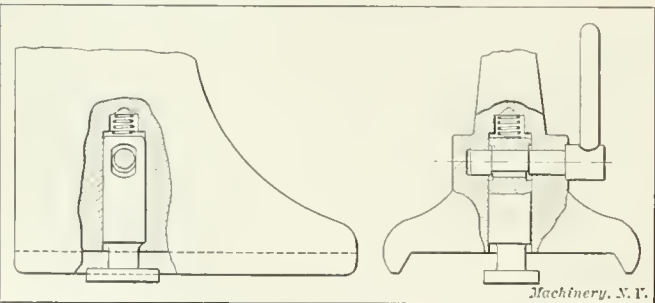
Eccentric Action Clamping Device used on Bench Lathes
